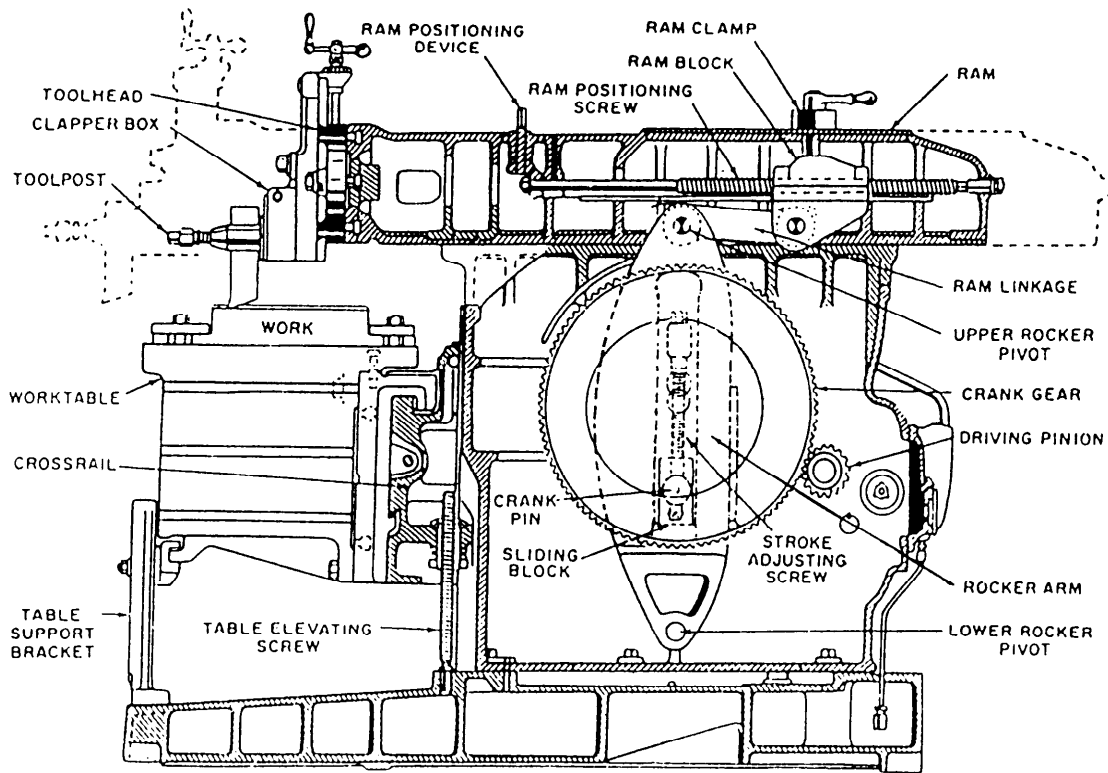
Cross-sectional view of a crank-type shaper.
